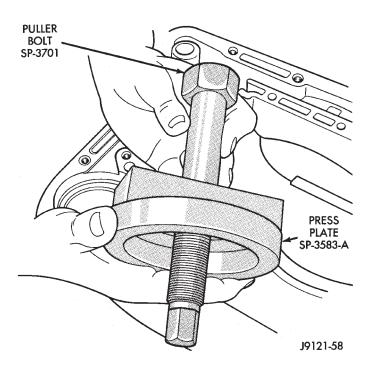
Assembling Clutch Cam Puller Bolt And Press Plate
